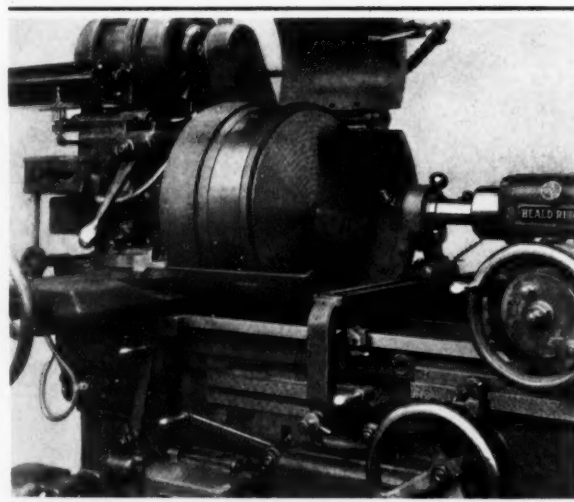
Heald No. 70 Grinding Machine Equipped with a Magnetic Chuck that Adapts the Machine to General Tool-room Work
